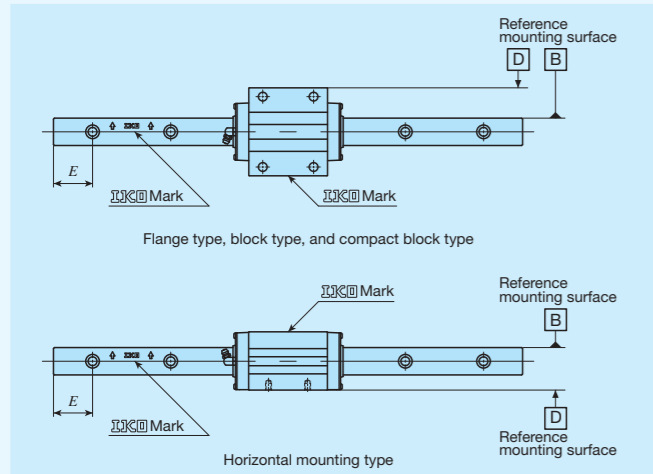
Specified rail mounting hole positions (Supplemental code /E)
